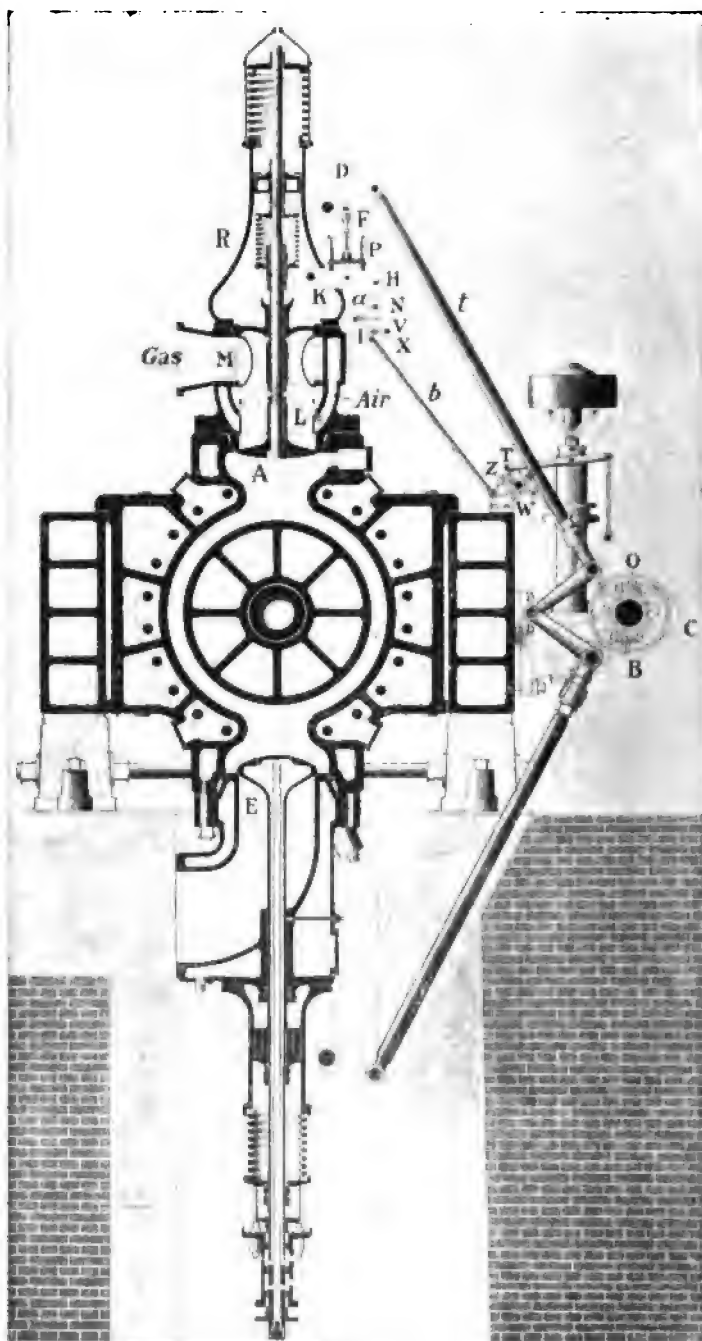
ARRANGEMENT OF PARTS OF THE COCKERILL ENGINE.
